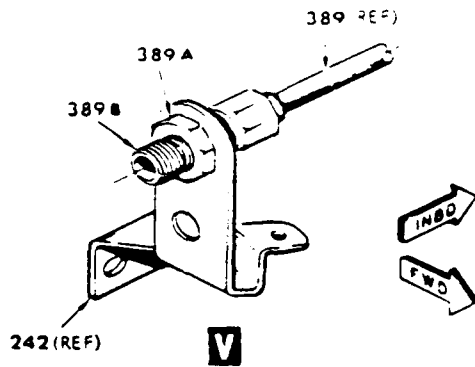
RH Aft Strut Assembly (Sheet 14 of 18)
